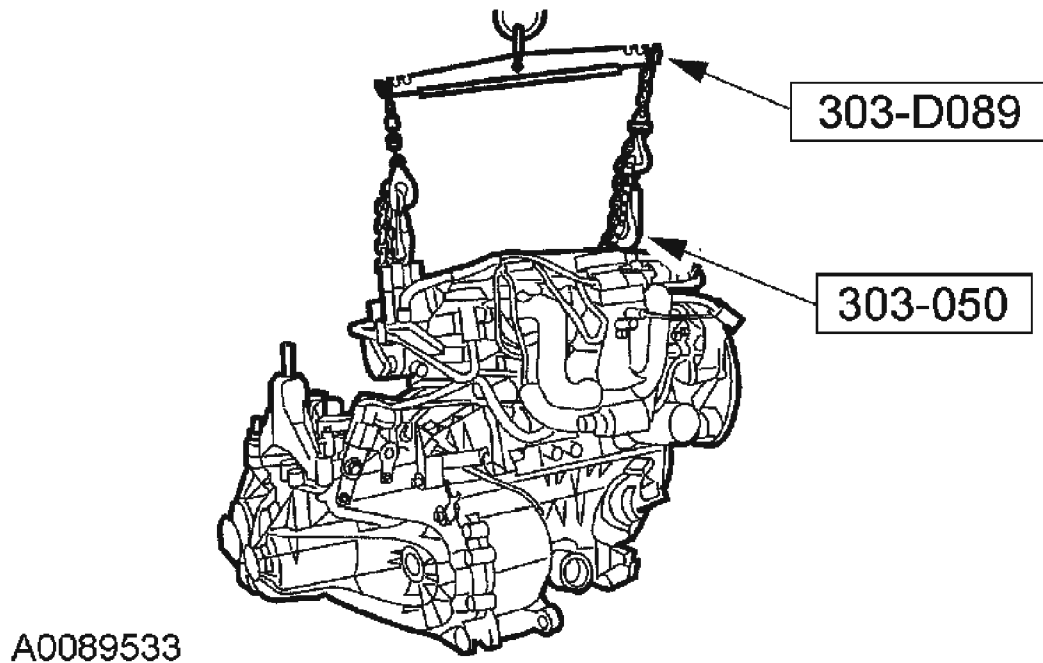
Raising Engine And Transaxle Assembly Onto Lift Table Using Special Tools
